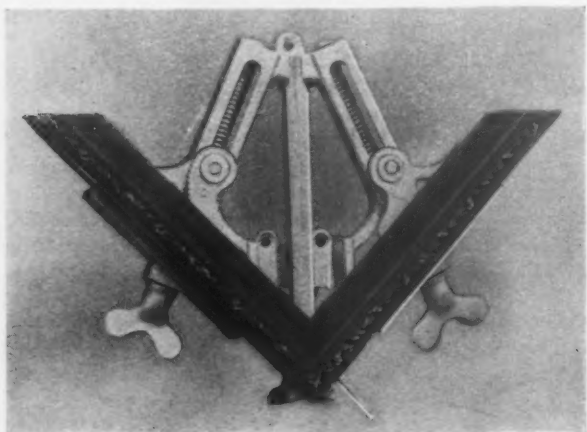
Draw Clamp with Saw Guide Removed, Holding Mitered Ends for Nailing.
